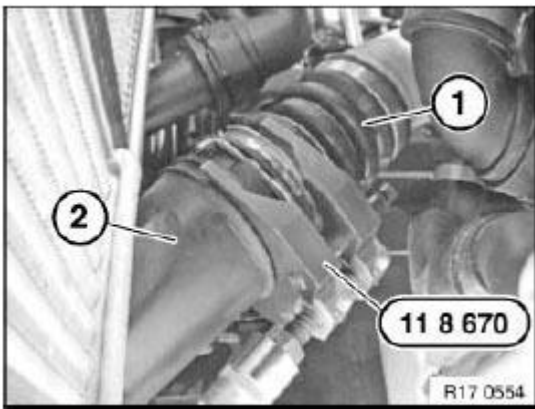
Identifying Charge-Air Duct With Special Tool 11 8 670
